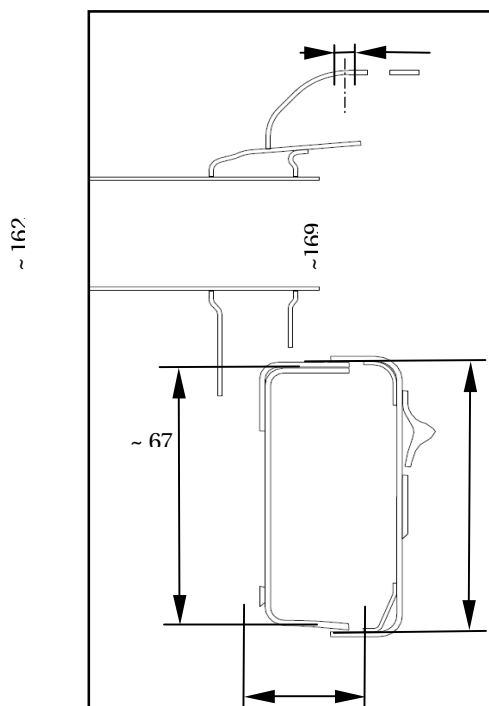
Section Q-Q (Amarok SC)
